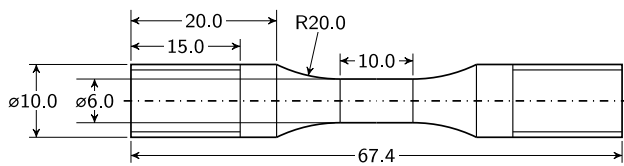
Geometry of UT specimens. All dimensions in mm.
